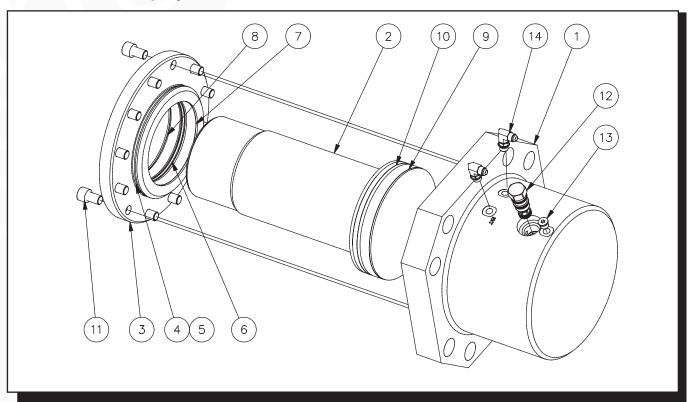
J. 200 Caisson Clamp Cylinder Assembly #250001
